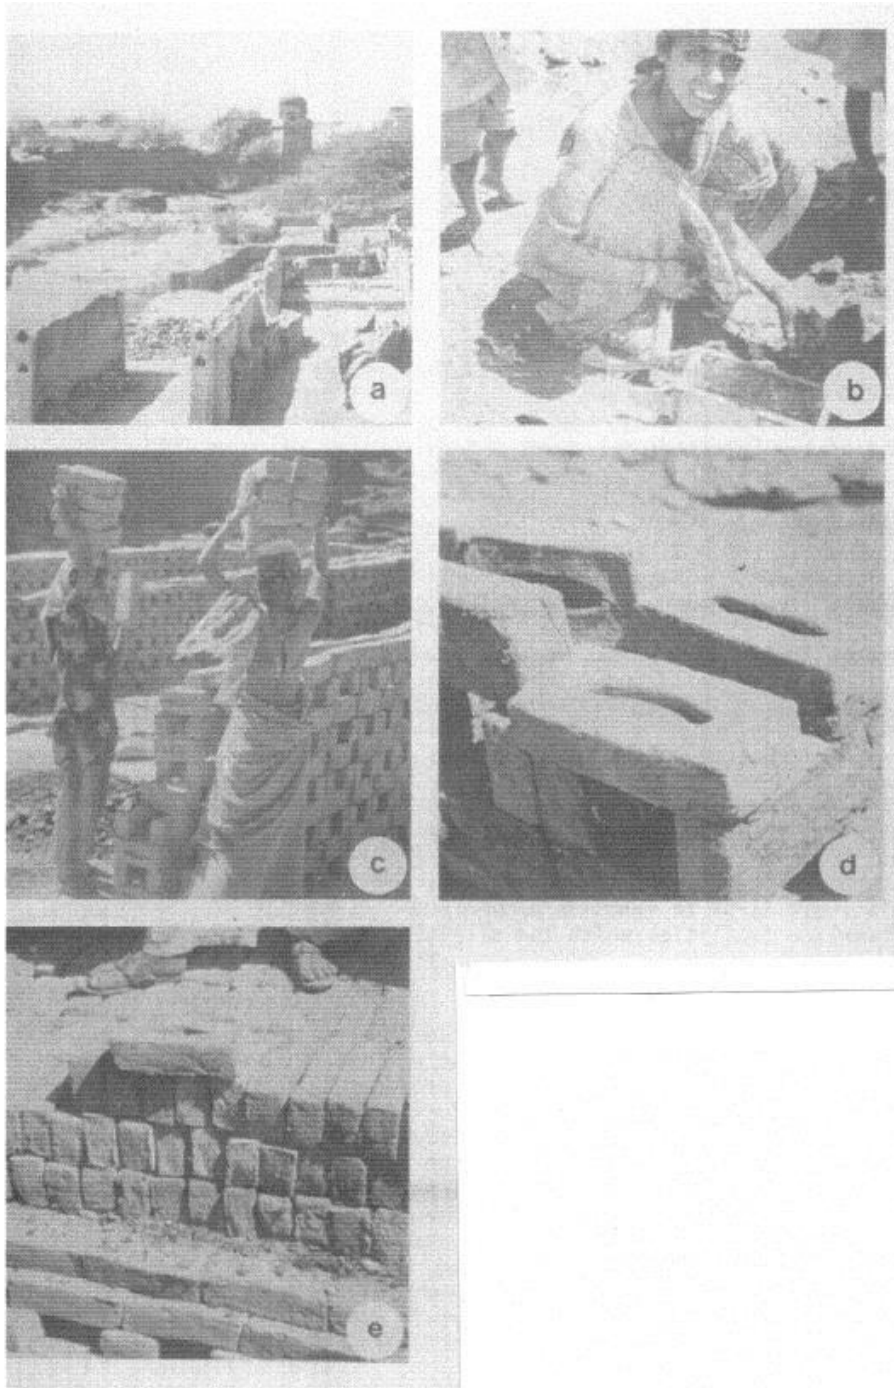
Typical town brick production in Aurangbad. (a) View of production facility along a river bank; (b) Bricks are hand molded singly; (c) Bricks are stacked for drying before firing; (d) Variable dimensions of drying brick; (e) Newly fired brick exhibits extensive shape defects.
